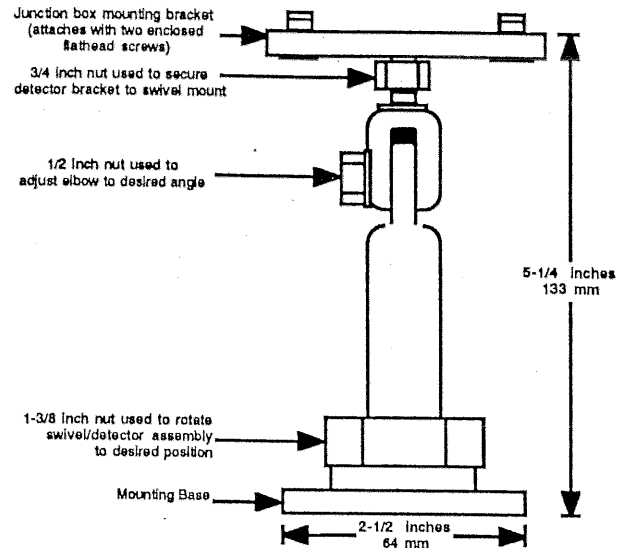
Q9001G Swivel Mounting Bracket (replaces Q9001F)
